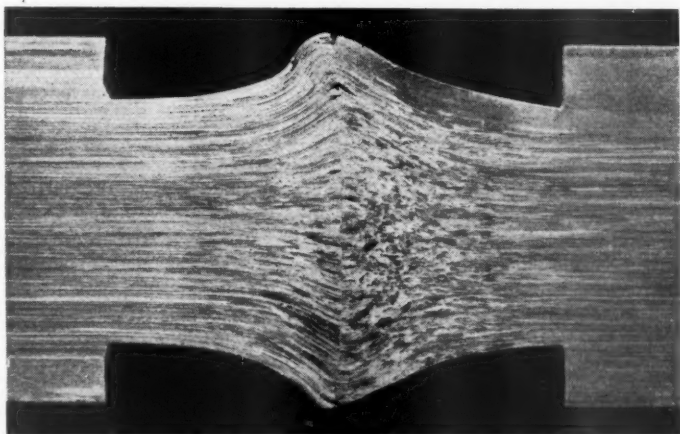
Section of pressure weld in Al-Mg-Si alloy (D.T.D. 423B).
